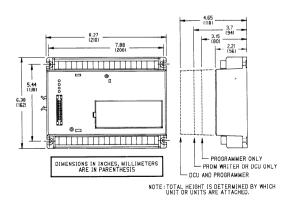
MOUNTING DIMENSIONS, BASIC UNIT
